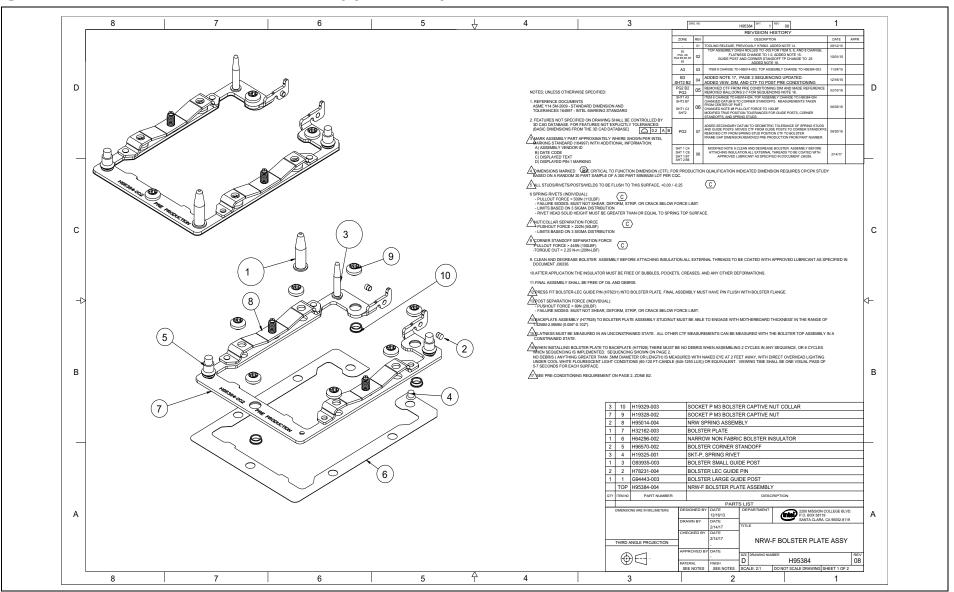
Narrow - Fabric Bolster Plate Assembly (Sheet 2 of 2)
